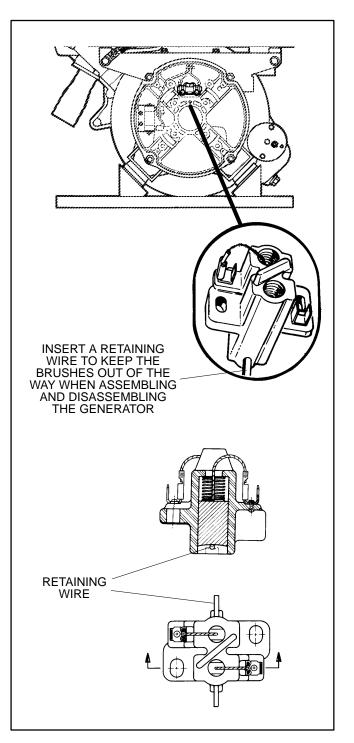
BRUSH BLOCK ASSEMBLY
